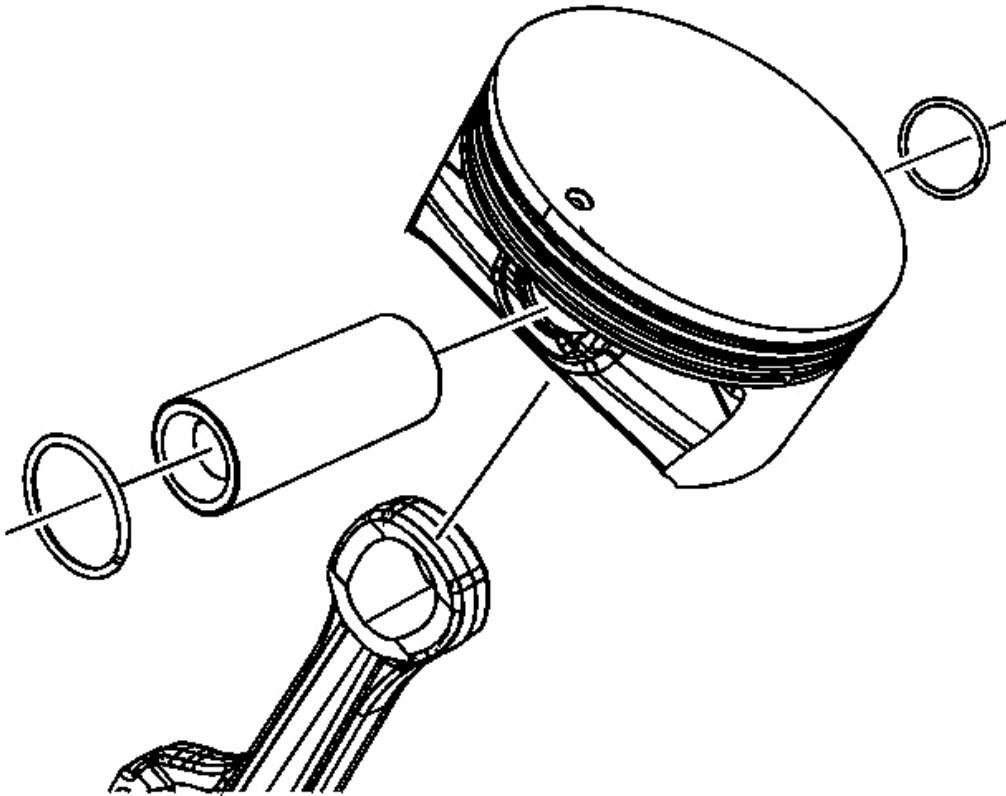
View Of Piston Pin, Piston & Connecting Rod
